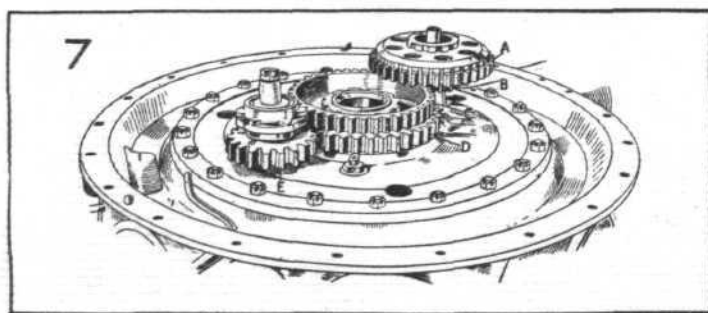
The diaphragm plate of the geared fan type engine. (a) is the intermediate fan gear, (b) the clutch support, (c) the clutch driving gear, (d) the auxiliary driving gear, and (e) the auxiliary idler gear.
